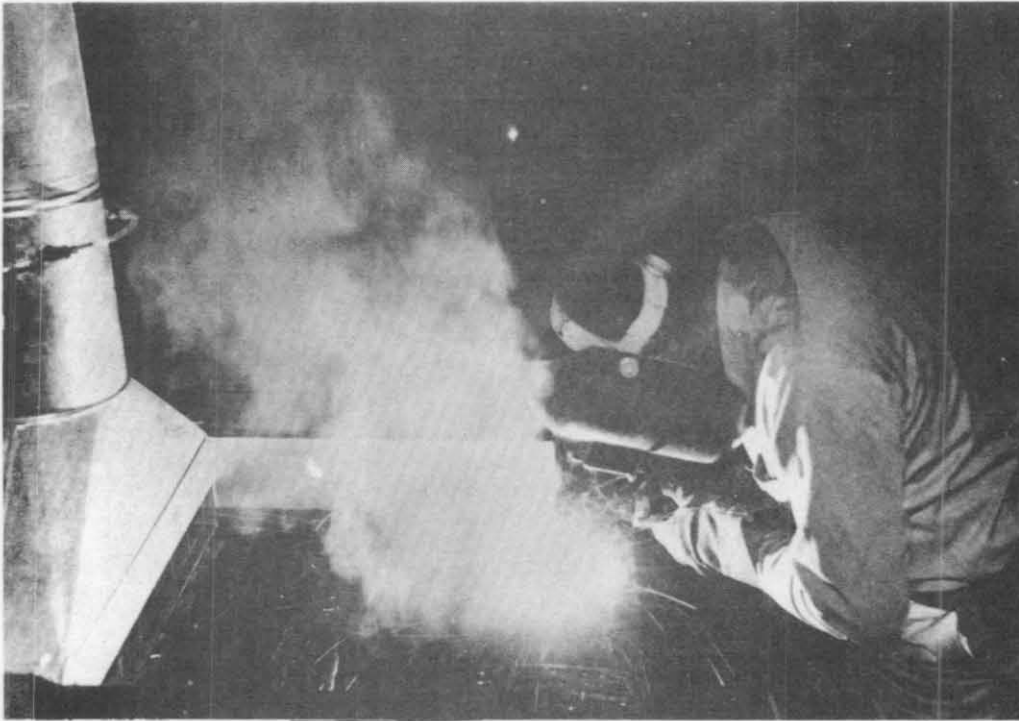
Fume Cloud From Gas Shielded Arc Welding Process
